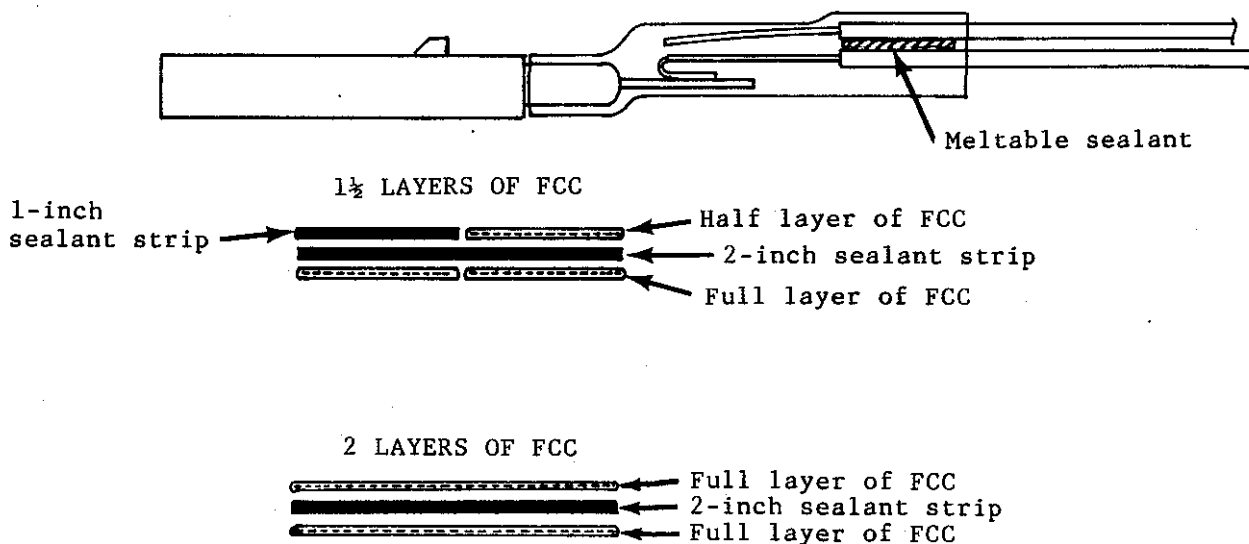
CTA-0055 Sealant Inserted Between FCC Layers
